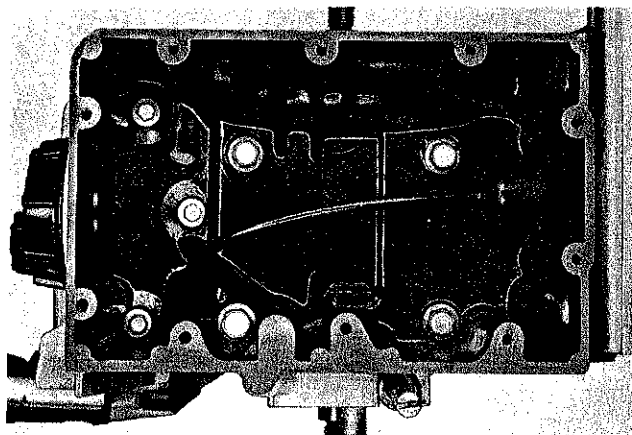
Sealing screws are used to attach the fuel tank to the crankcase, and the oiler tank to the fuel tank.
